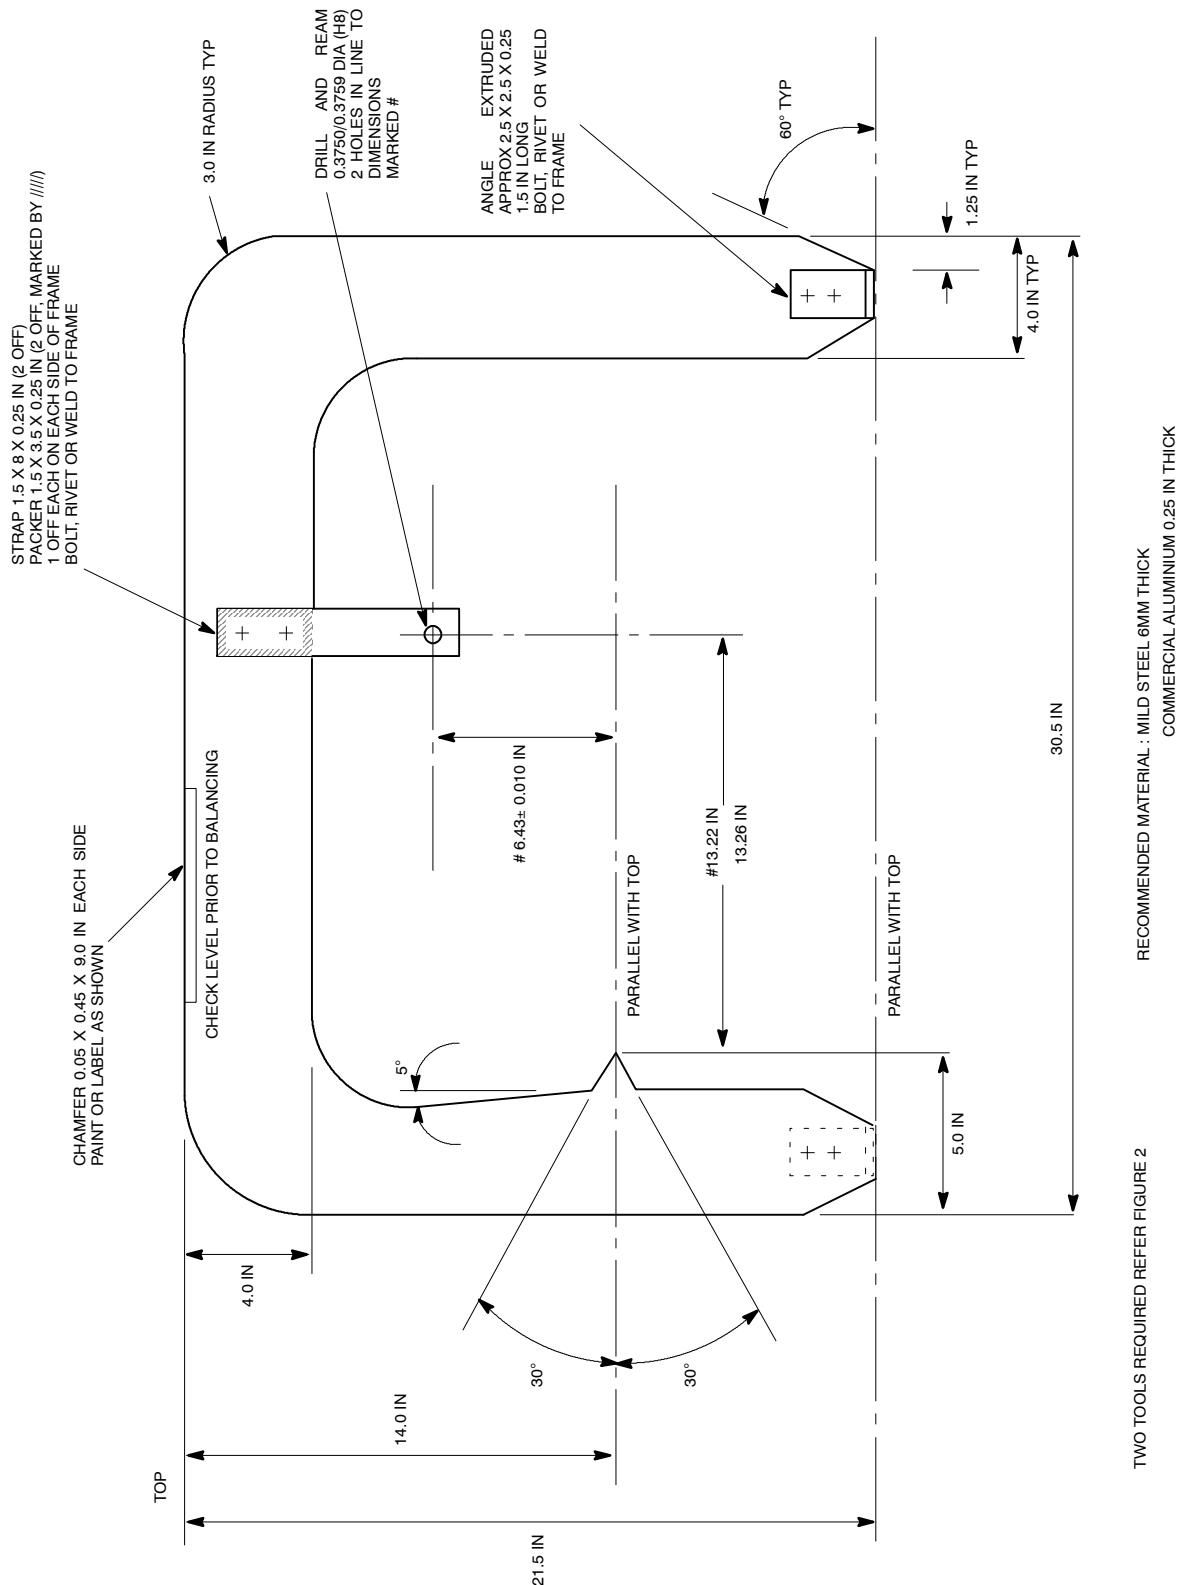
Aileron Static Balancing Tool — Local Manufacture
